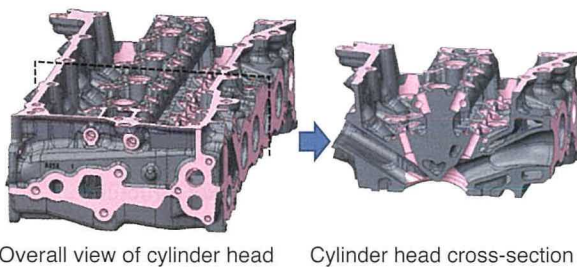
Overall and Cross-Sectional Views of Cylinder Head
